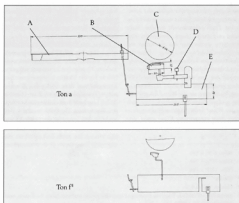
Terpedion: Cross section of the mechanism A = Key, B = Friction rod, C = Cylinder, D = Weights, E = Sounding boards.
